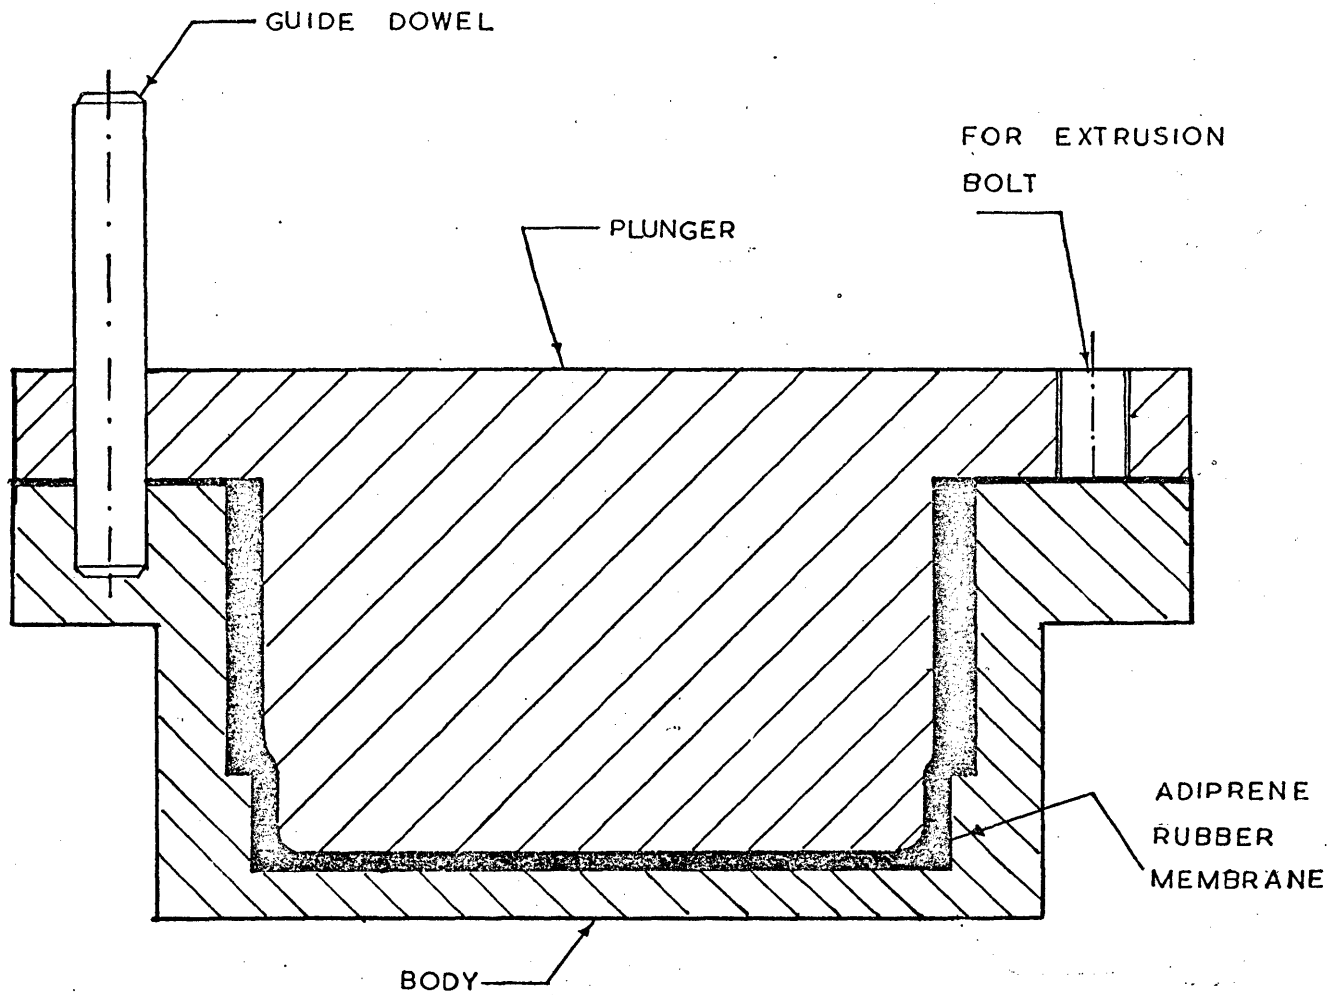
Stainless steel mould for casting an Adiprene rubber membrane
